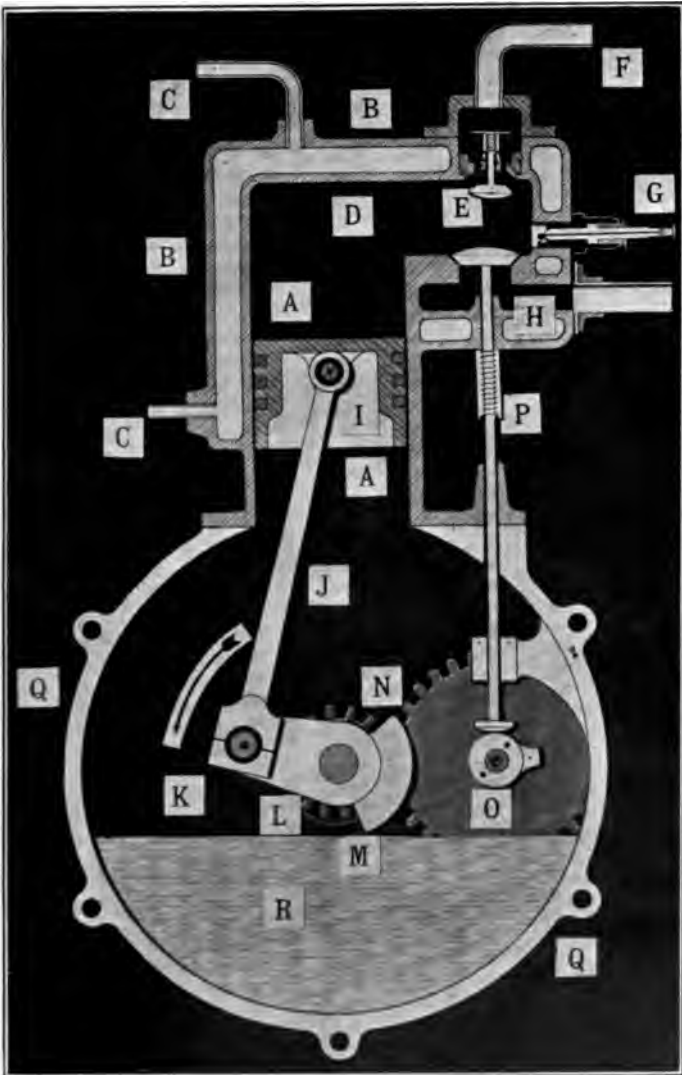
DIAGRAMMATIC SECTION OF PETROL ENGINE
